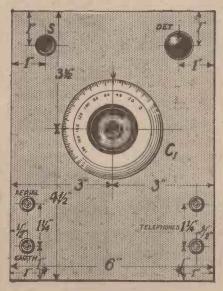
Nine holes require to be drilled in the panel, the positions of which may be obtained from this dimensioned drawing.
